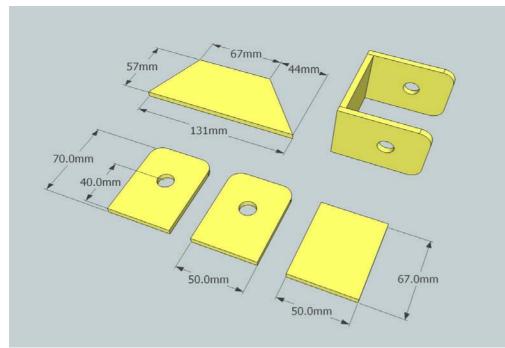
Rear Upper Wishbone - Upright Bracket and plates
